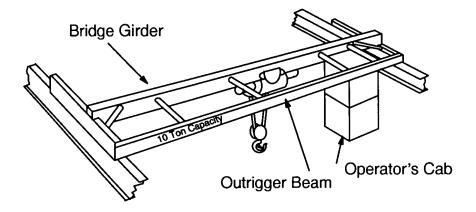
Top-running single- or multiple-girder bridge with top-running trolley hoist.
